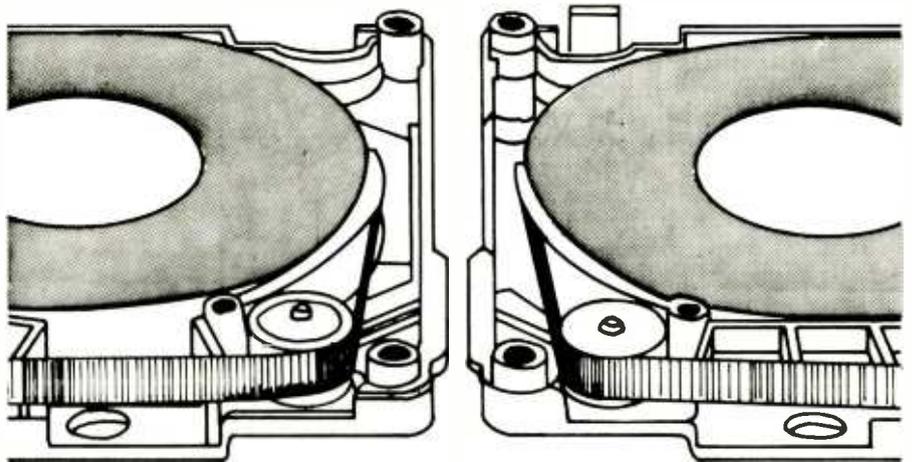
Differences in appearance between steel axis pin and roller (left) and plastic molded roller guide and axis pin (right).
